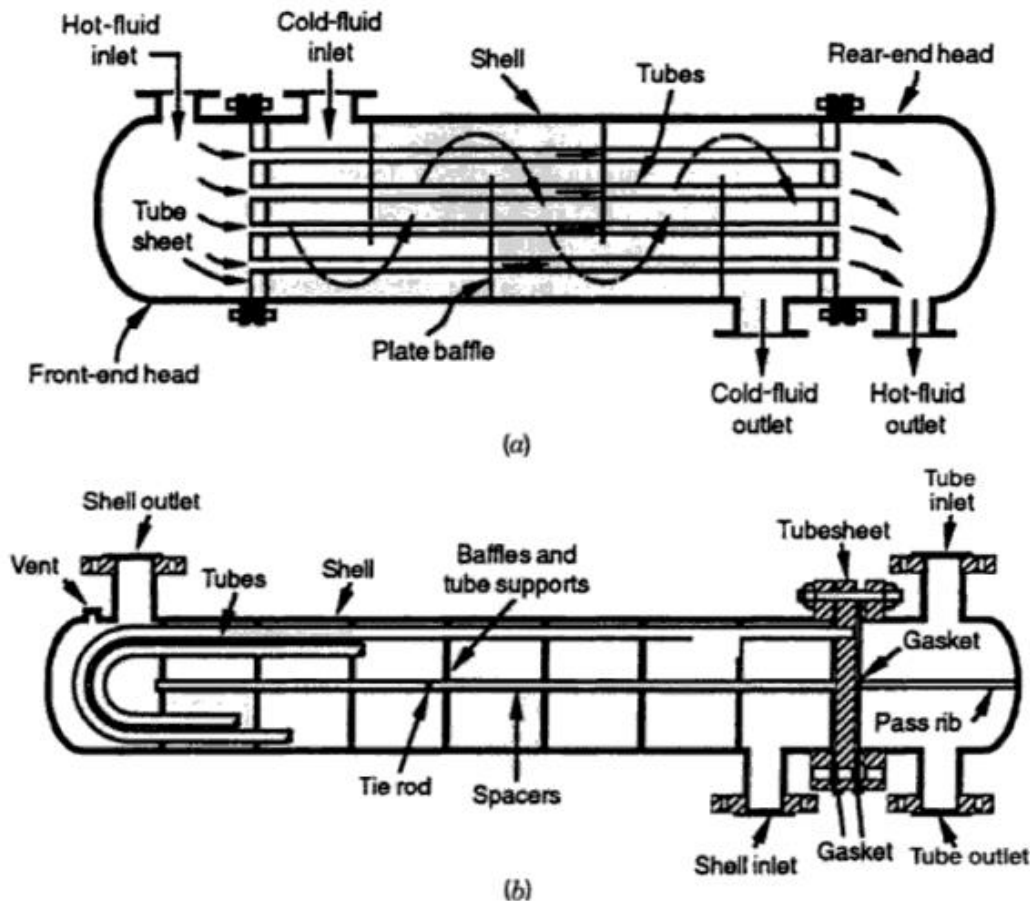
(a) Shell and tube exchanger (BEM) with one shell pass and one tube pass; (b) Shell and tube exchanger (BEU) with one shell pass and two tube passes (Ramesh & Dusan 2003:13)
